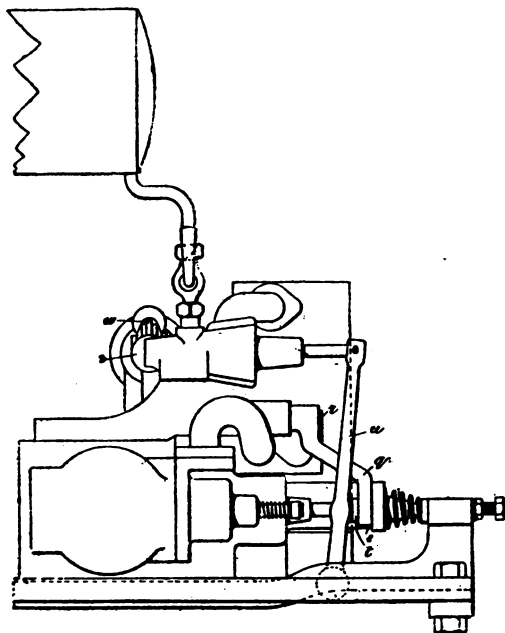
Roots' Governor for Petroleum or Explosive Engines.
